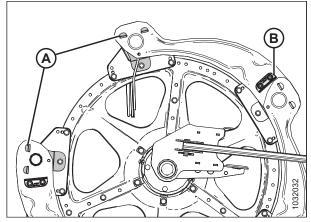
Reel Endshield Removed – Outboard Tail End
